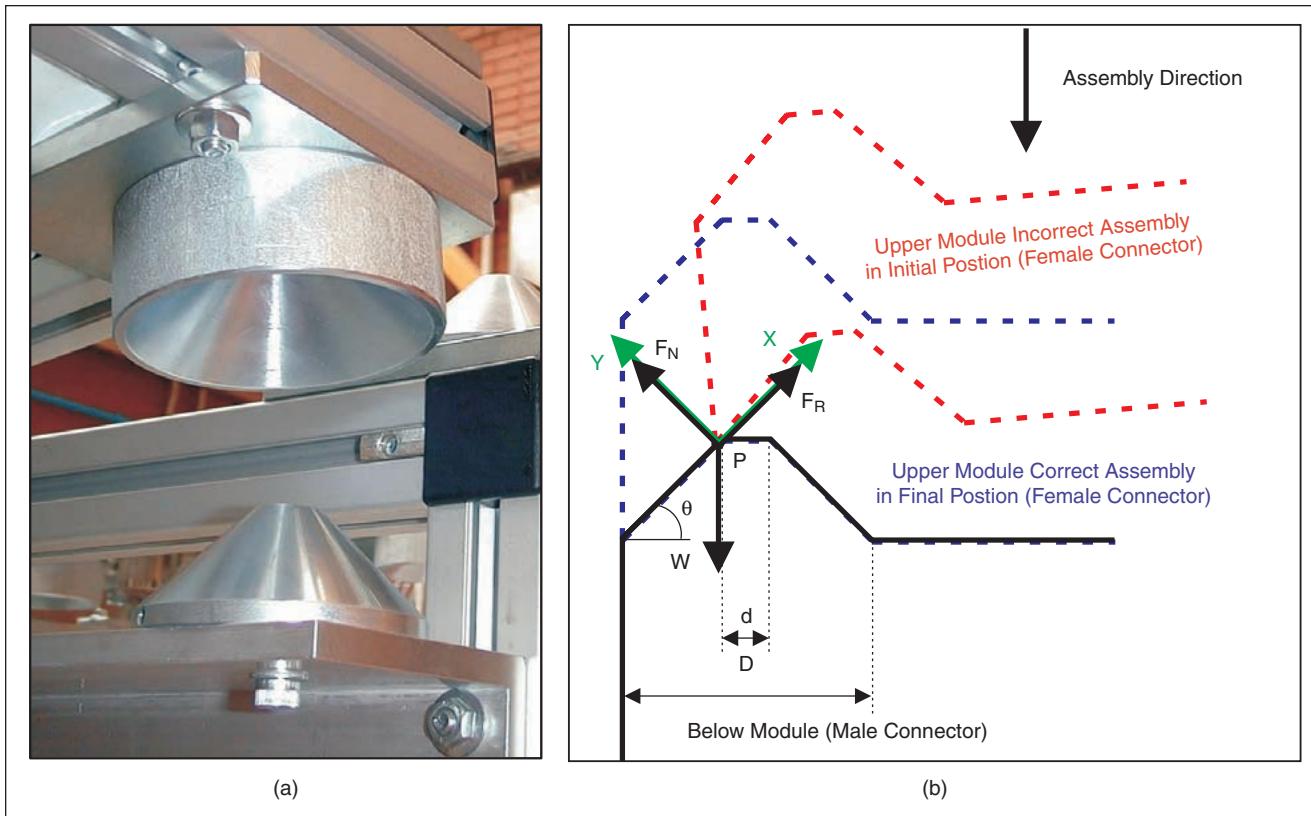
Assembly connectors: (a) female and male connectors and (b) force analysis during the assembly.
